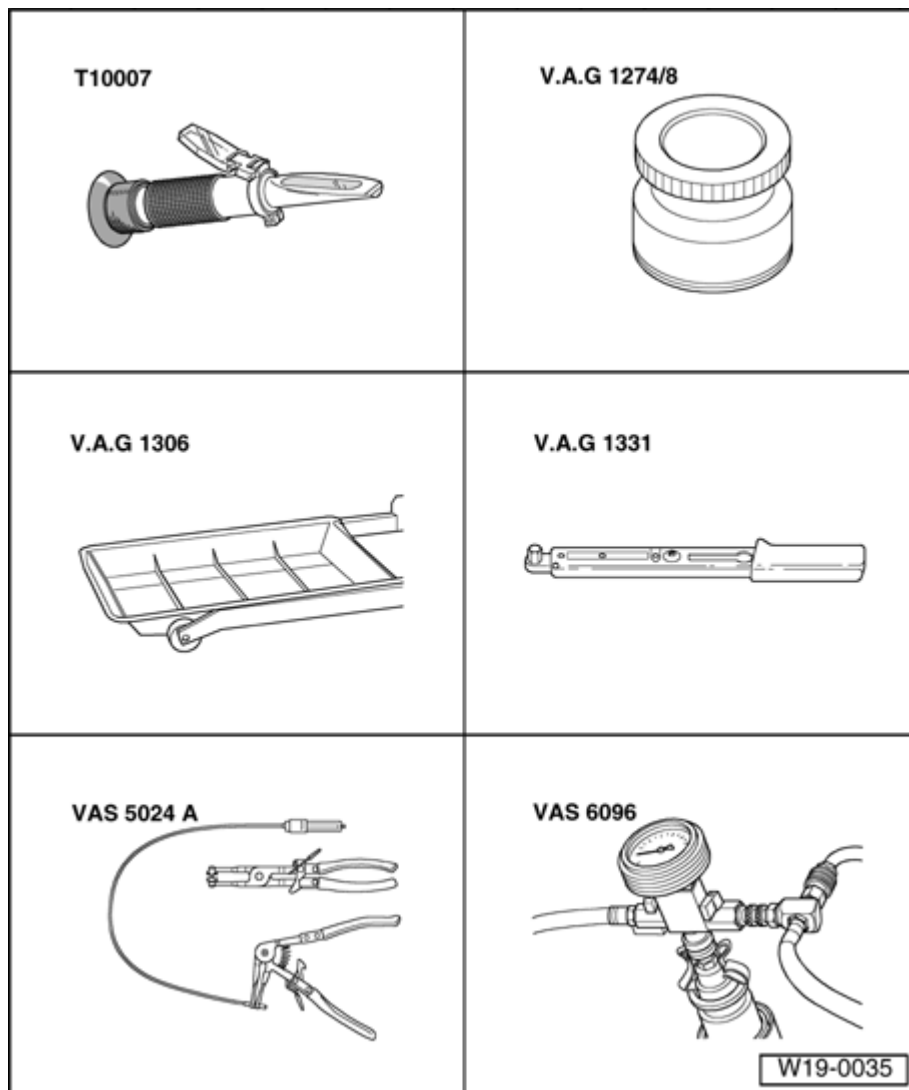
Identifying Special Tools - Cooling System, Draining And Filling
